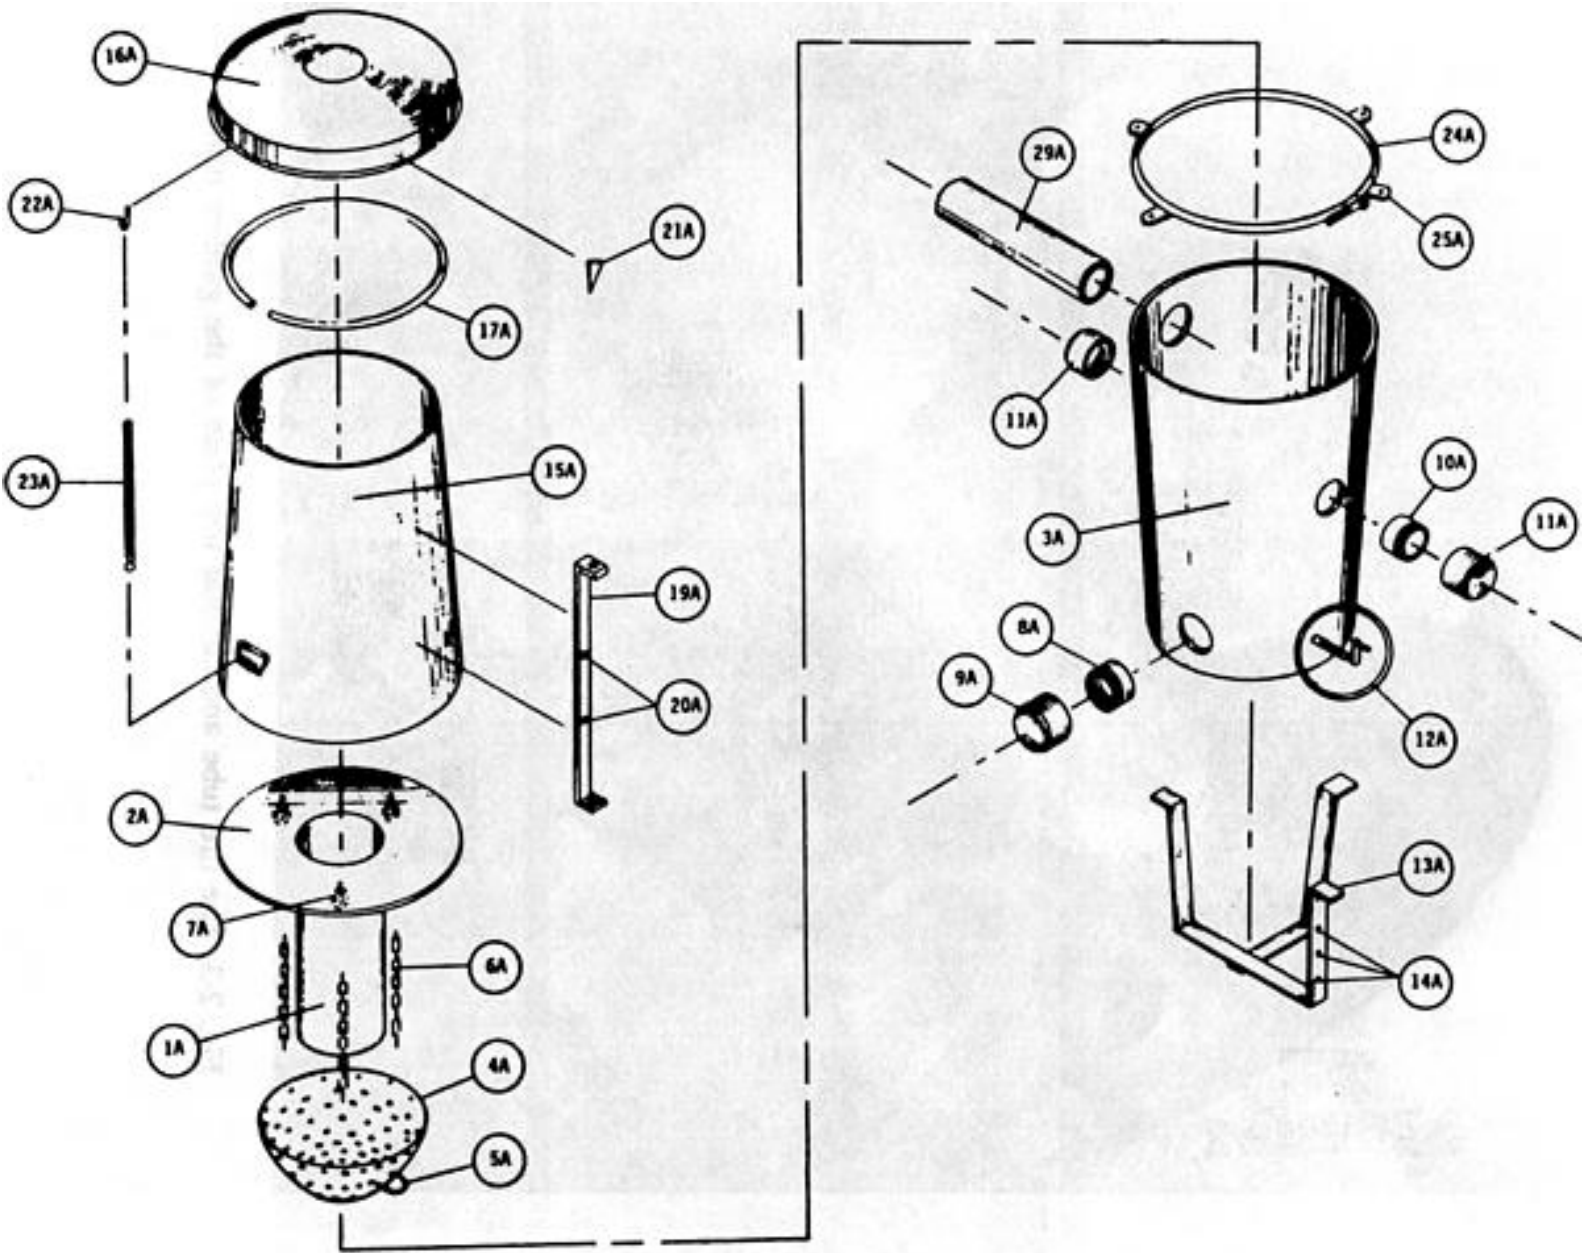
Exploded, schematic diagram of the wood gas generator unit and the fuel hopper.
